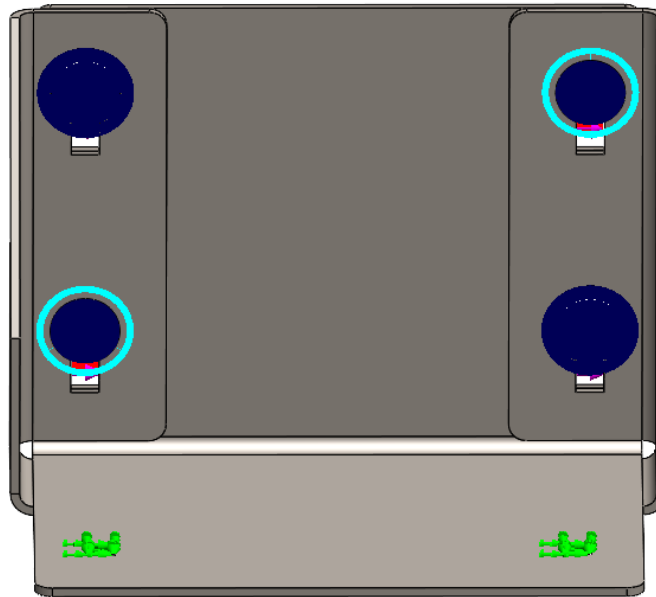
BRACKET 8R FIXTURES AND LOADING CONDITIONS.
